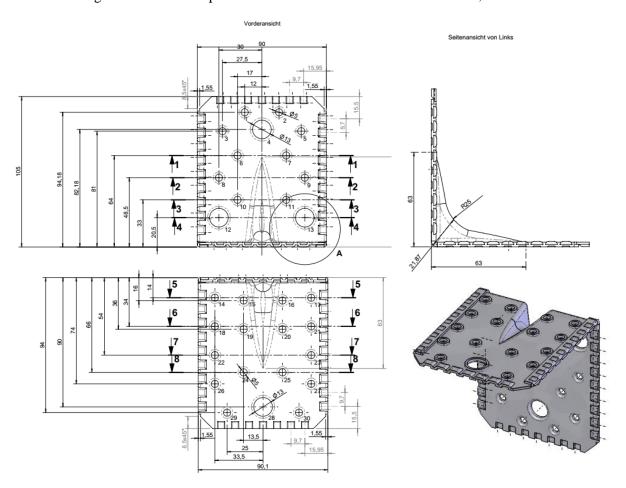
Dimensions of Angle Bracket 105 with rib, thickness 1,5 mm
